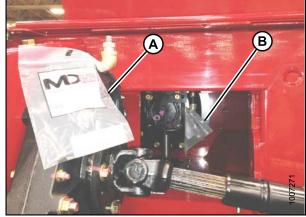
Bevel Gearbox 16 ft Shown, 13 ft Similar
